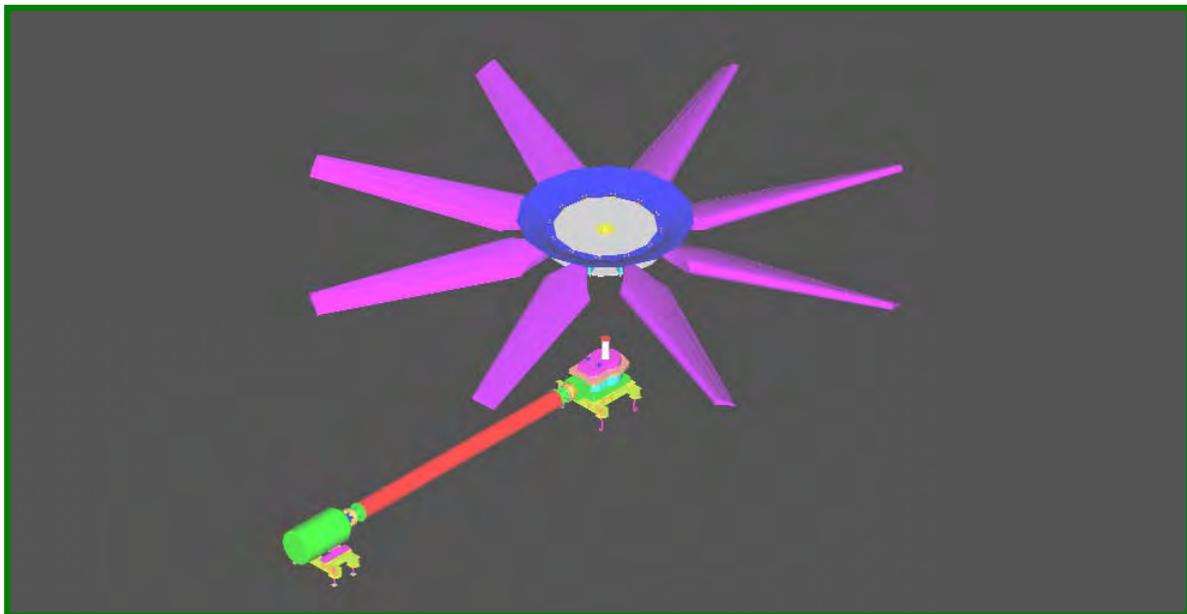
3D View of Gearbox, Motor, Drive Shaft and Fan Assembly
